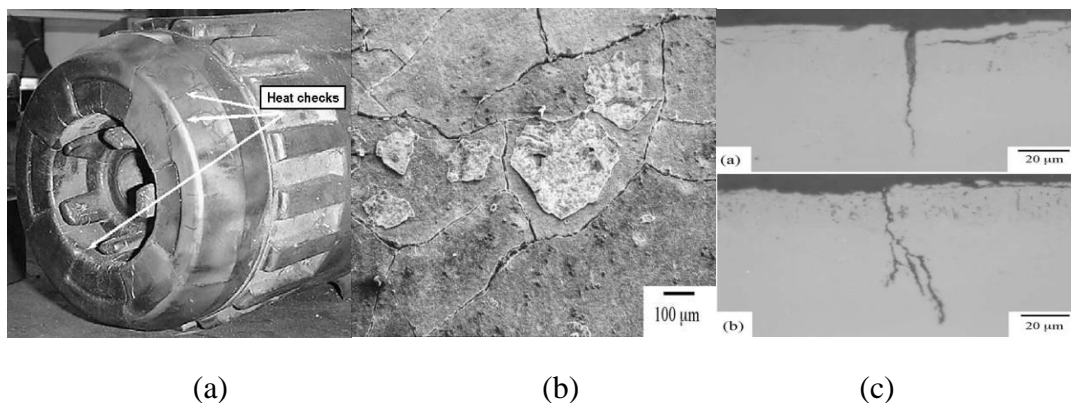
a) Cracks in transmission die [2], b) surface cracking detail [5] and c) polished cross-section revealing typical thermal cracks [5]
